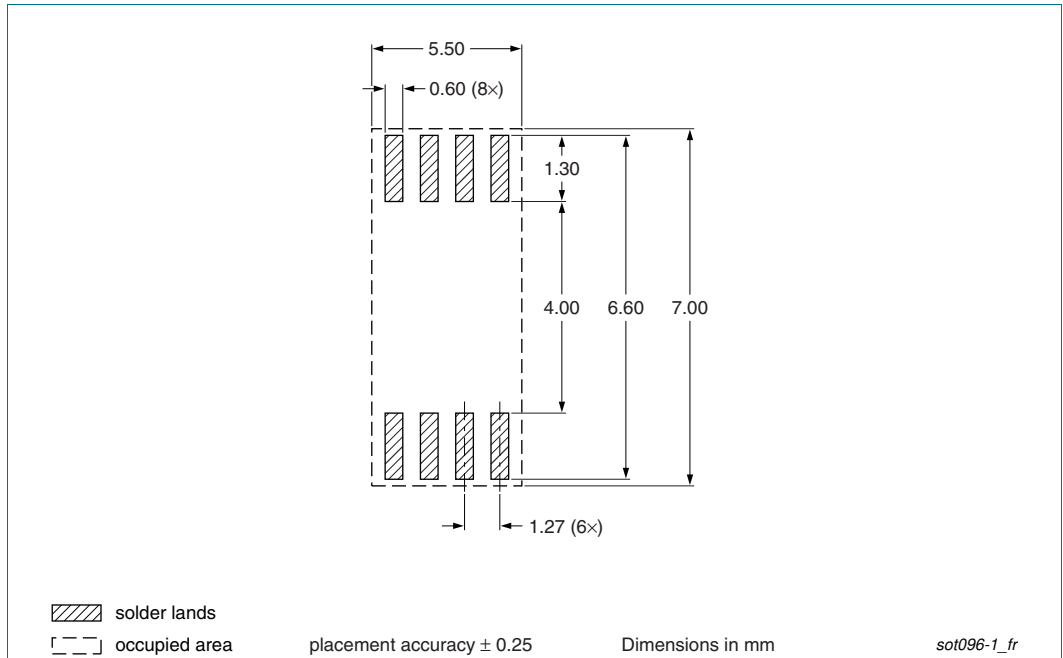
Reflow soldering footprint SOT96-1 (SO8)
